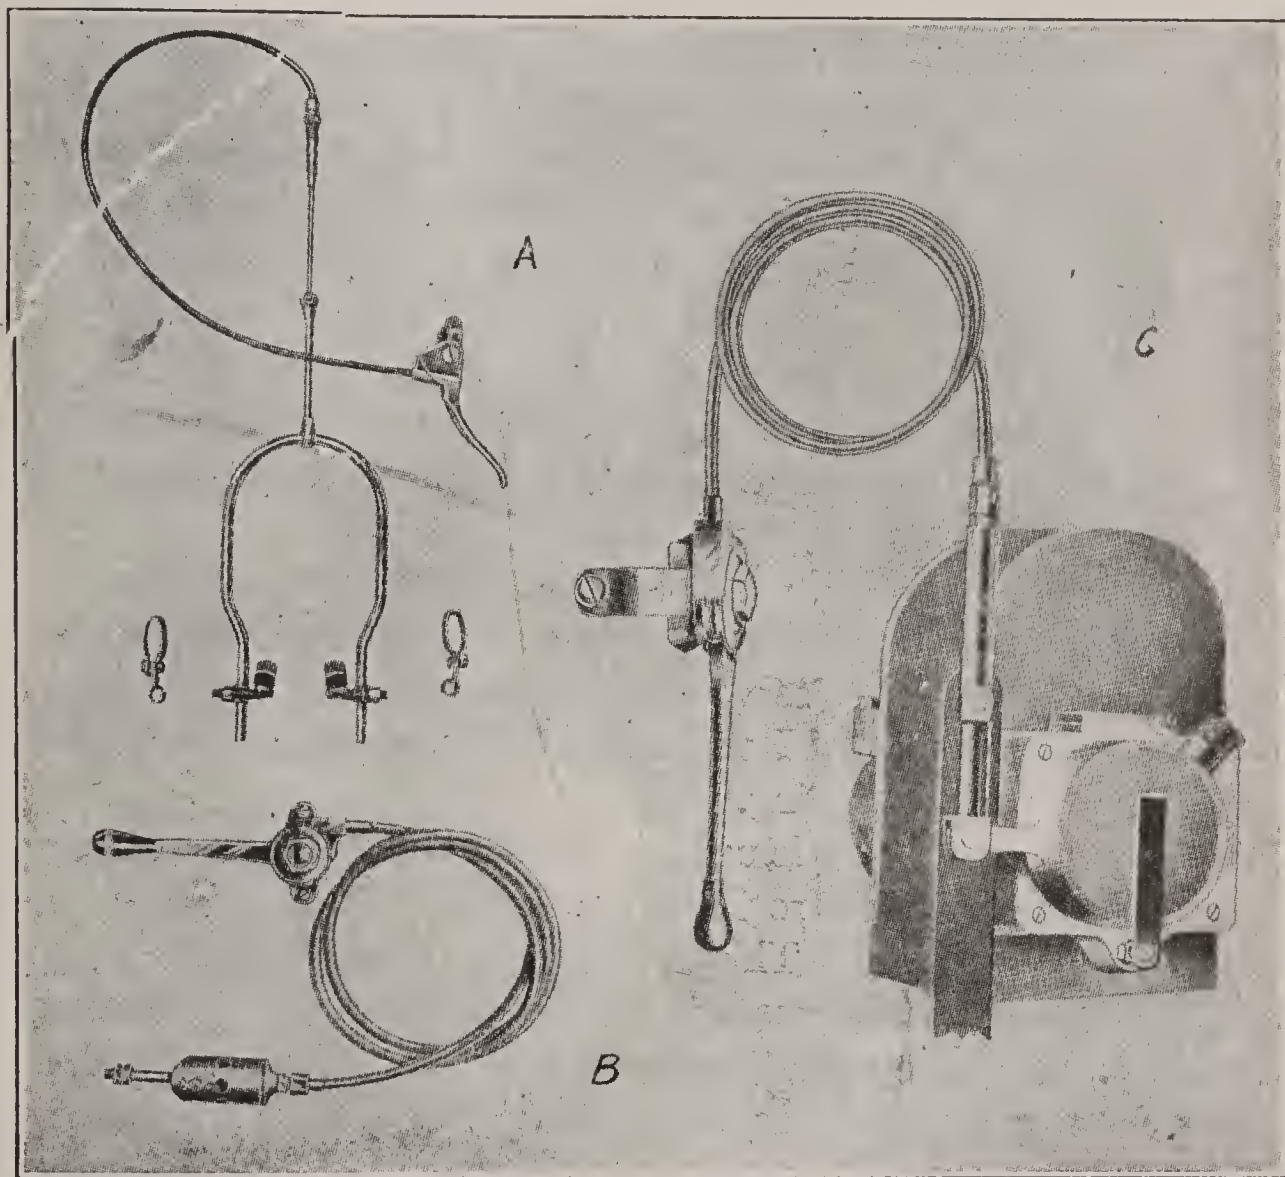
Showing Practical Application of Bowden Wire Mechanism for Controlling Front Wheel Brake, Auxiliary Air Intake and Magneto.
